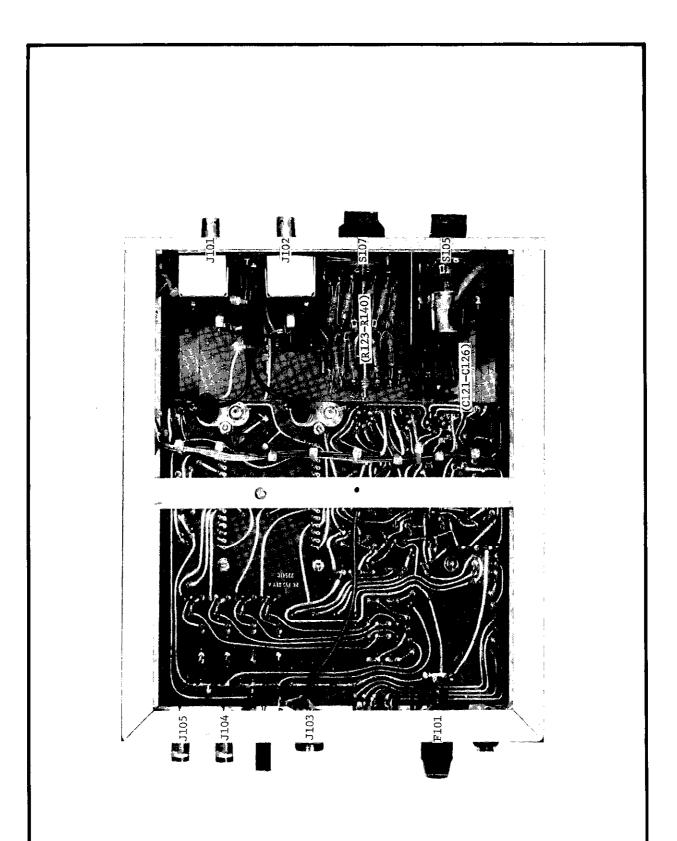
Top View Model 604 Chassis. Front panel faces up. Figure shows location of components, pc boards, and switches. For Bottom View, see Figure 15.
